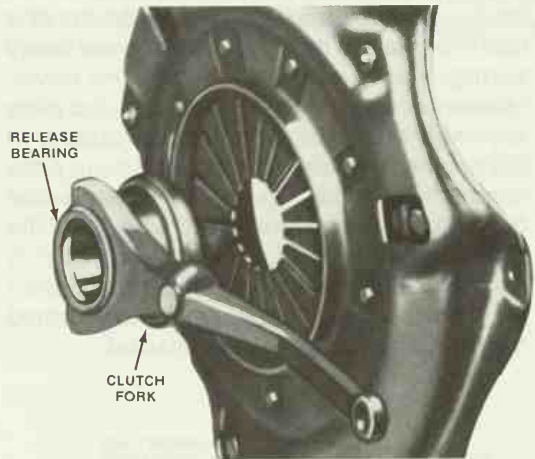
The release bearing is mounted on the clutch fork. (Chevrolet Motor Division of General Motors Corporation)
